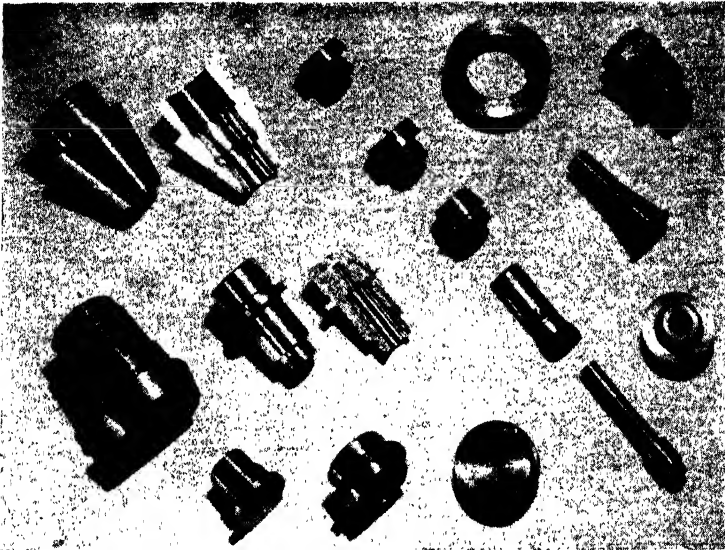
Parts produced from steel, brass, and aluminum bar stock on the screw machine. They could be duplicated, as to shape, by die casting but then would have the characteristics of cast rather than of wrought metals, of course, and would require some supplementary machining.
